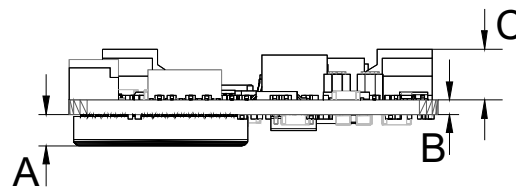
XETK-S4.2 Dimensions - Side View
